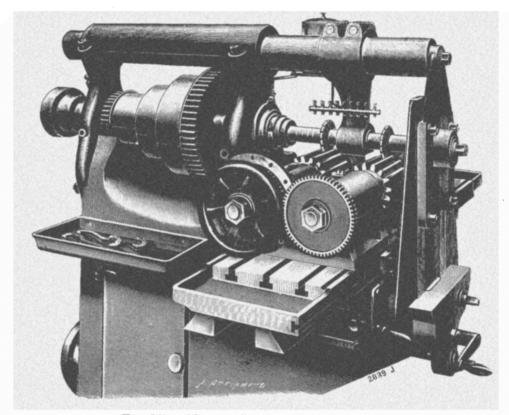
MILLING CUTTER FOR MOTOR PINIONS.
